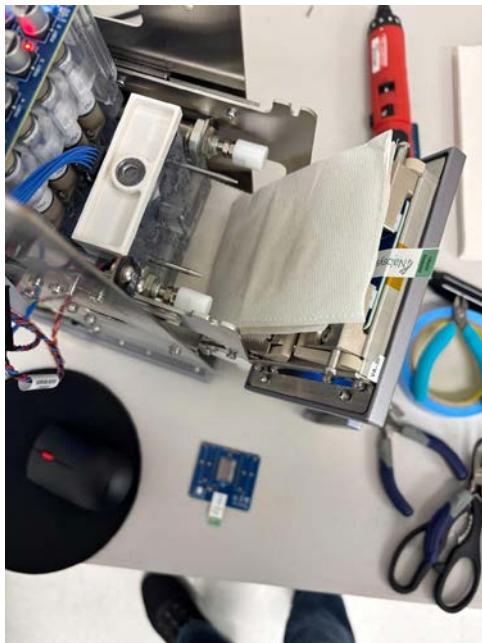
Paper towels over DAQ assembly to protect the faceplate.
